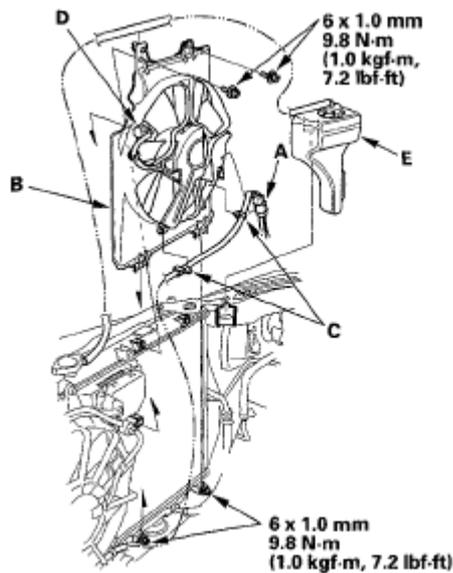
Identifying A/C Condenser Fan Shroud With Torque Specifications
